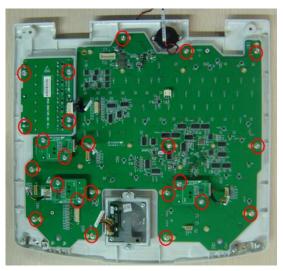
Disassembly of Control Panel and Silicon Rubber Keypad (3)
